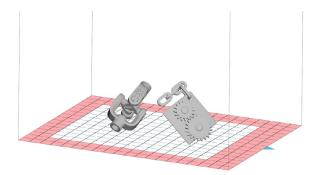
Incorrect arrangement, which may cause sticking of moving parts to surfaces.
